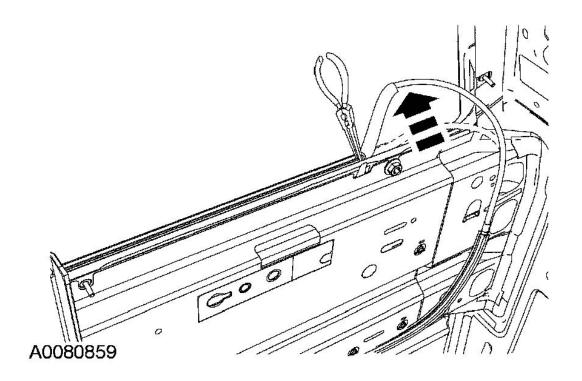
Clamping And Holding Cable Near Transition Block Courtesy of FORD MOTOR CO.
